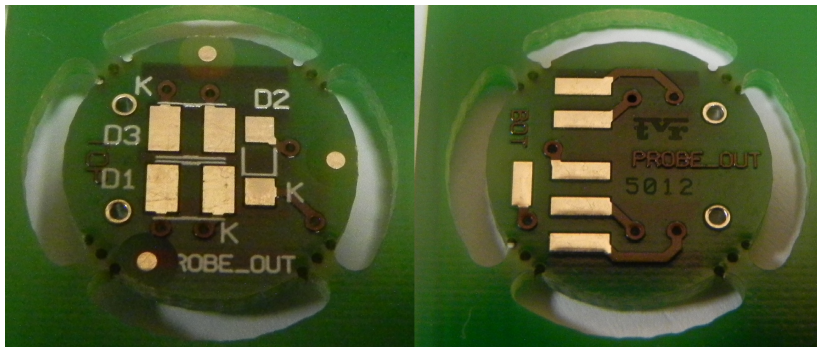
Printed circuit board for the LED probe. Left: top view, right: bottom view
